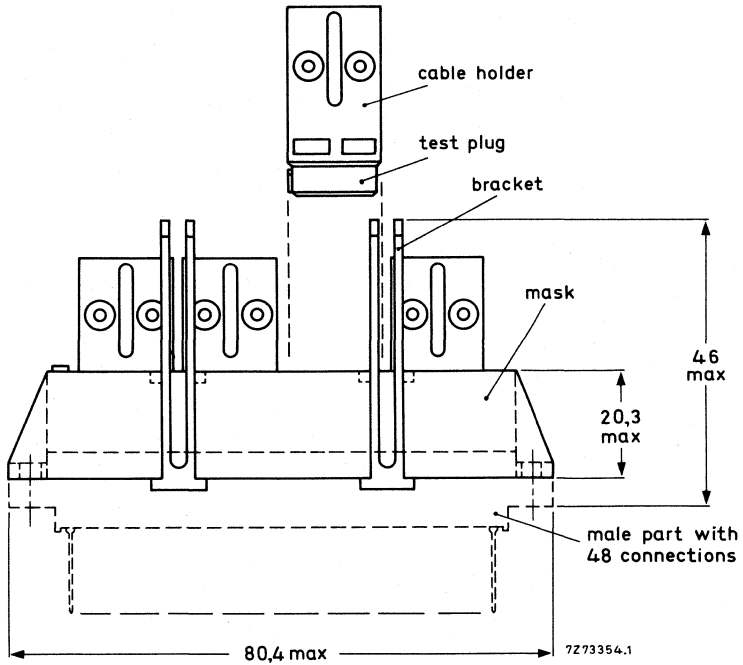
Four test plugs with auxiliary parts; dimensions in mm.
